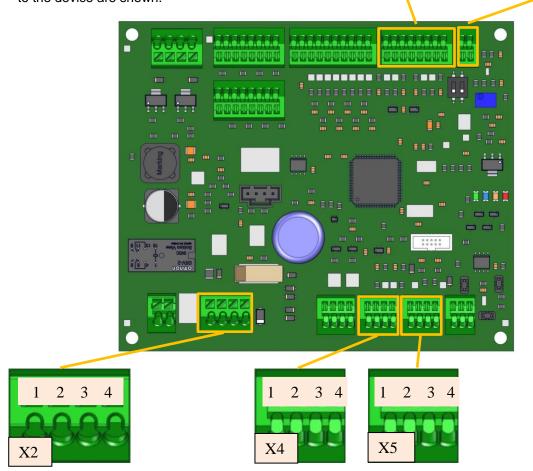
Control board PCB AIRWIN 3.1 Input
